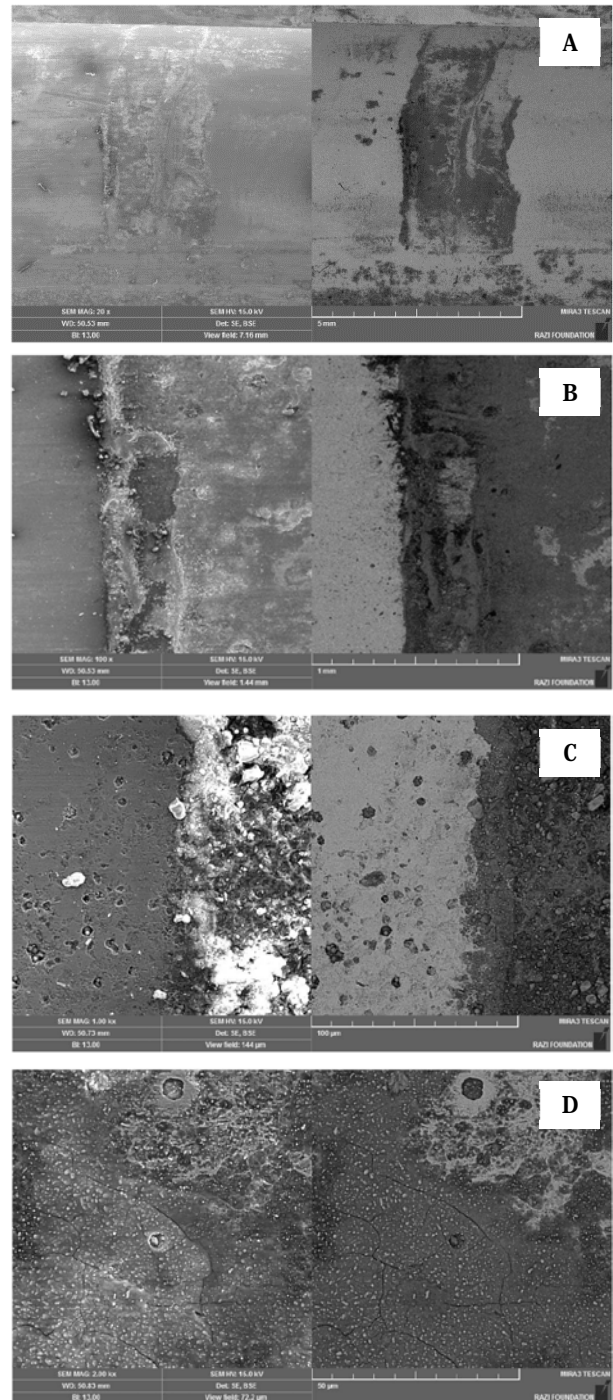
Magnifications of false brinelling damage in an angular contact ball bearing races (Mag: A-20×, B-100×, C-1000×, D-2000×)
